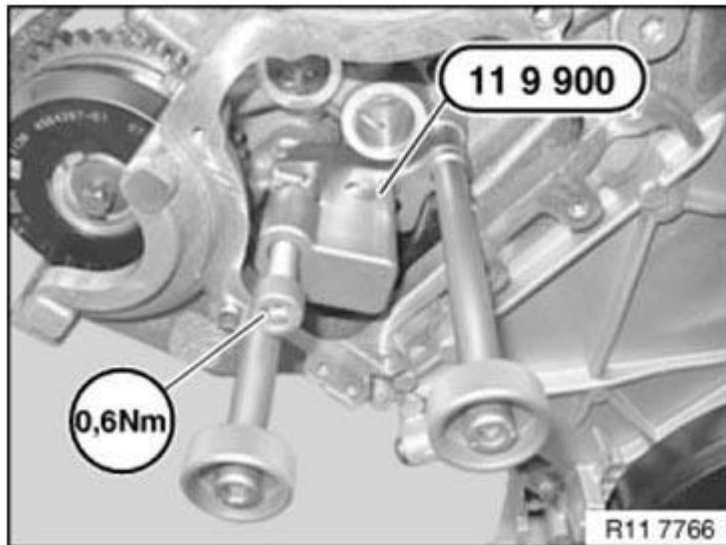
Preloading Hexagon Socket Screw With Special Tool 00 9 250 To 0.6 Nm
